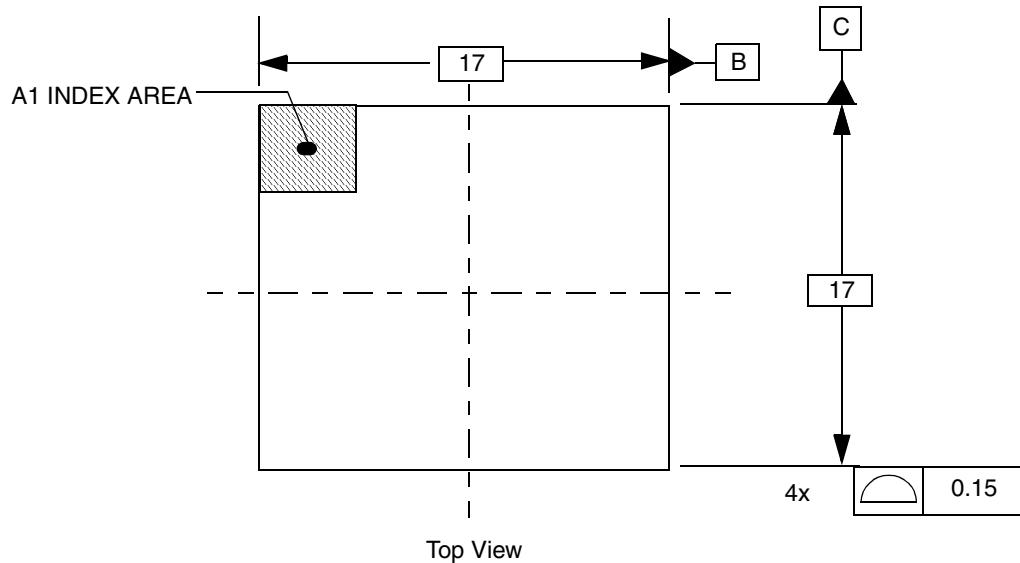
400 MAPBGA 17x17 mm Package Top view
